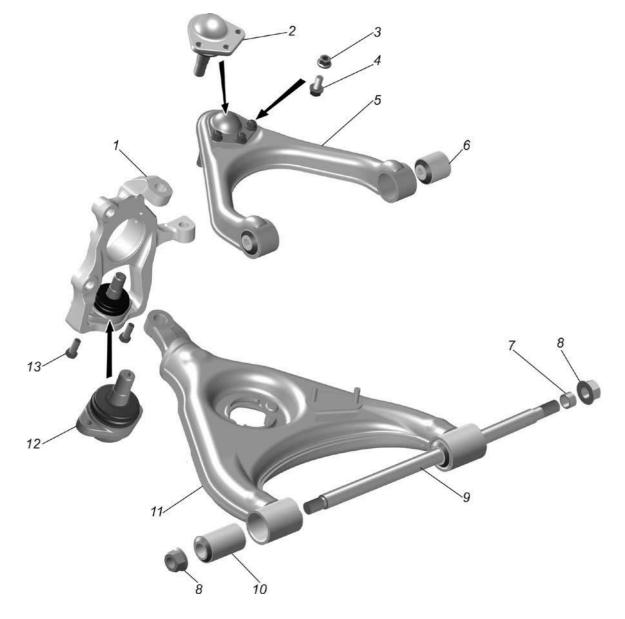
Suspension guide apparatus: 1 – strut; 2 – upper ball joint; 3, 8 – nuts; 4, 13 – bolts; 6 – upper arm silent–block; 7 – bushing; 9 – lower arm axis; 10 – lower arm silent–block; 11 – lower arm; 12 – lower ball joint
